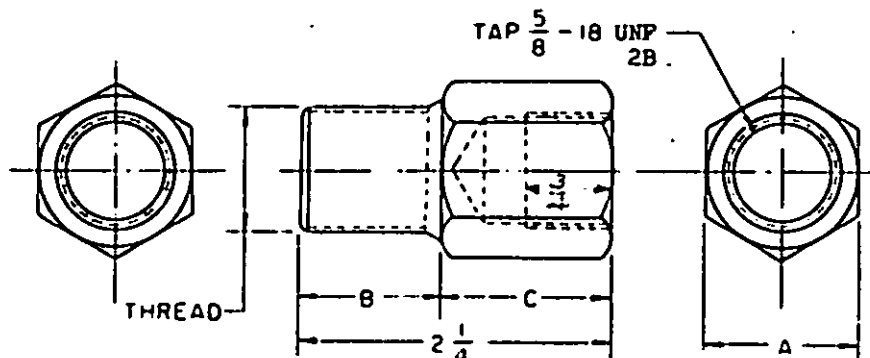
Type XIII class 1, style A puller adapter, forcing screw thread size adapting, mechanical, gear and bearing. male and female thread with 5/8-18 UNF-2B tapped hole.
